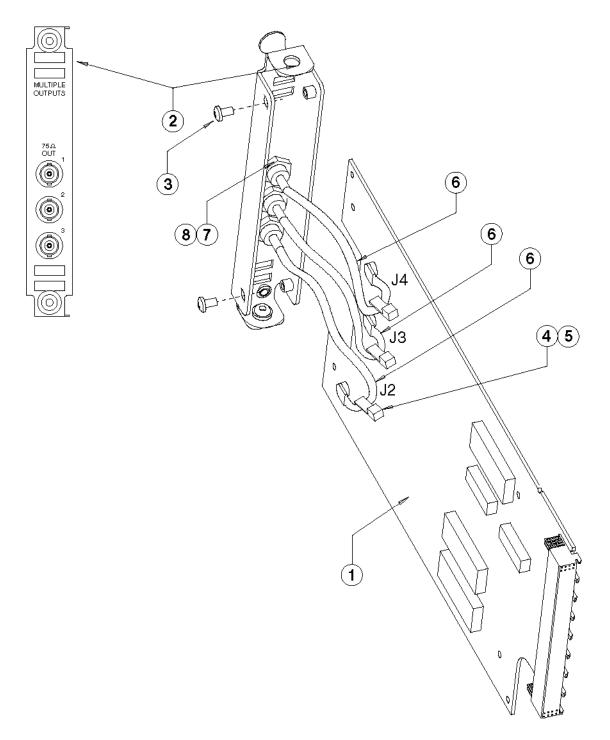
Option UHC Multiple Output Module - Exploded View
